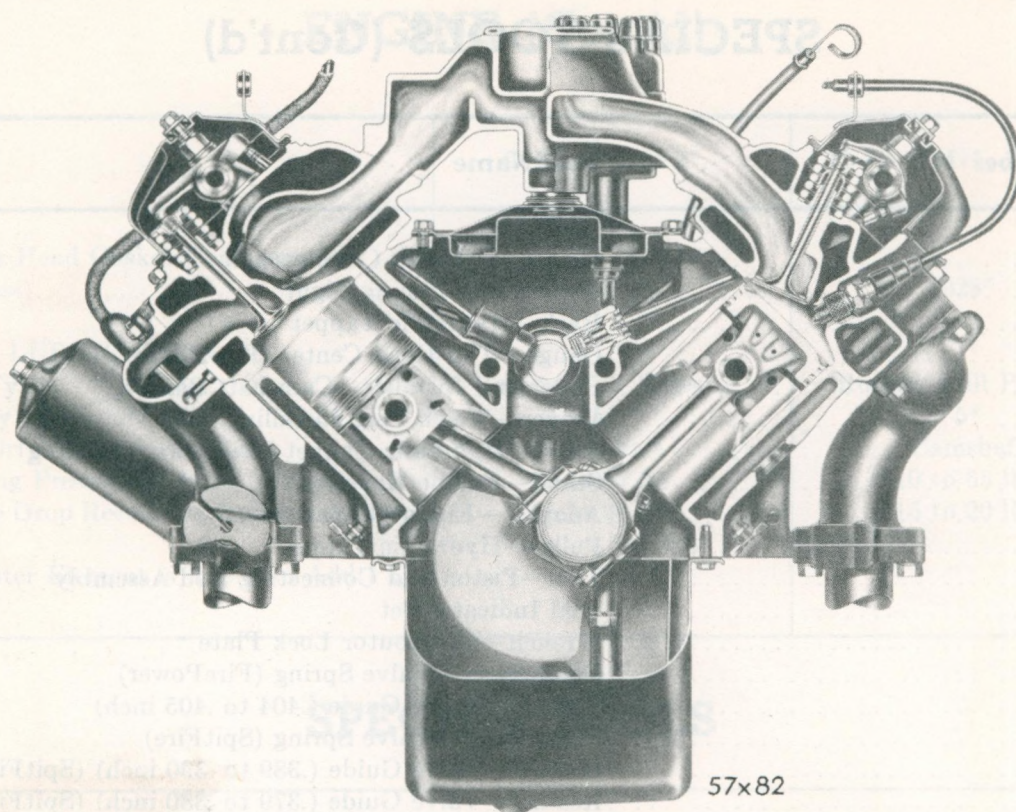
SpitFire V-8 Engine (End Sectional View)
